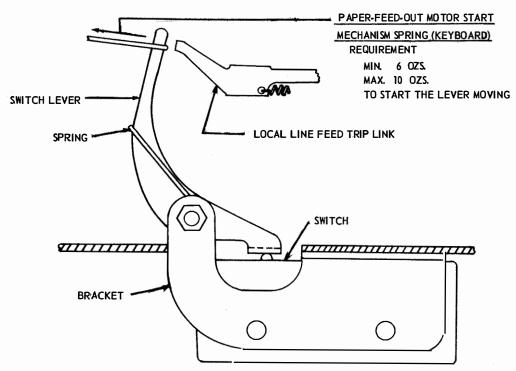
KEYBOARD, MARGIN INDICATING AND PAPER FEED-OUT MECHANISMS
